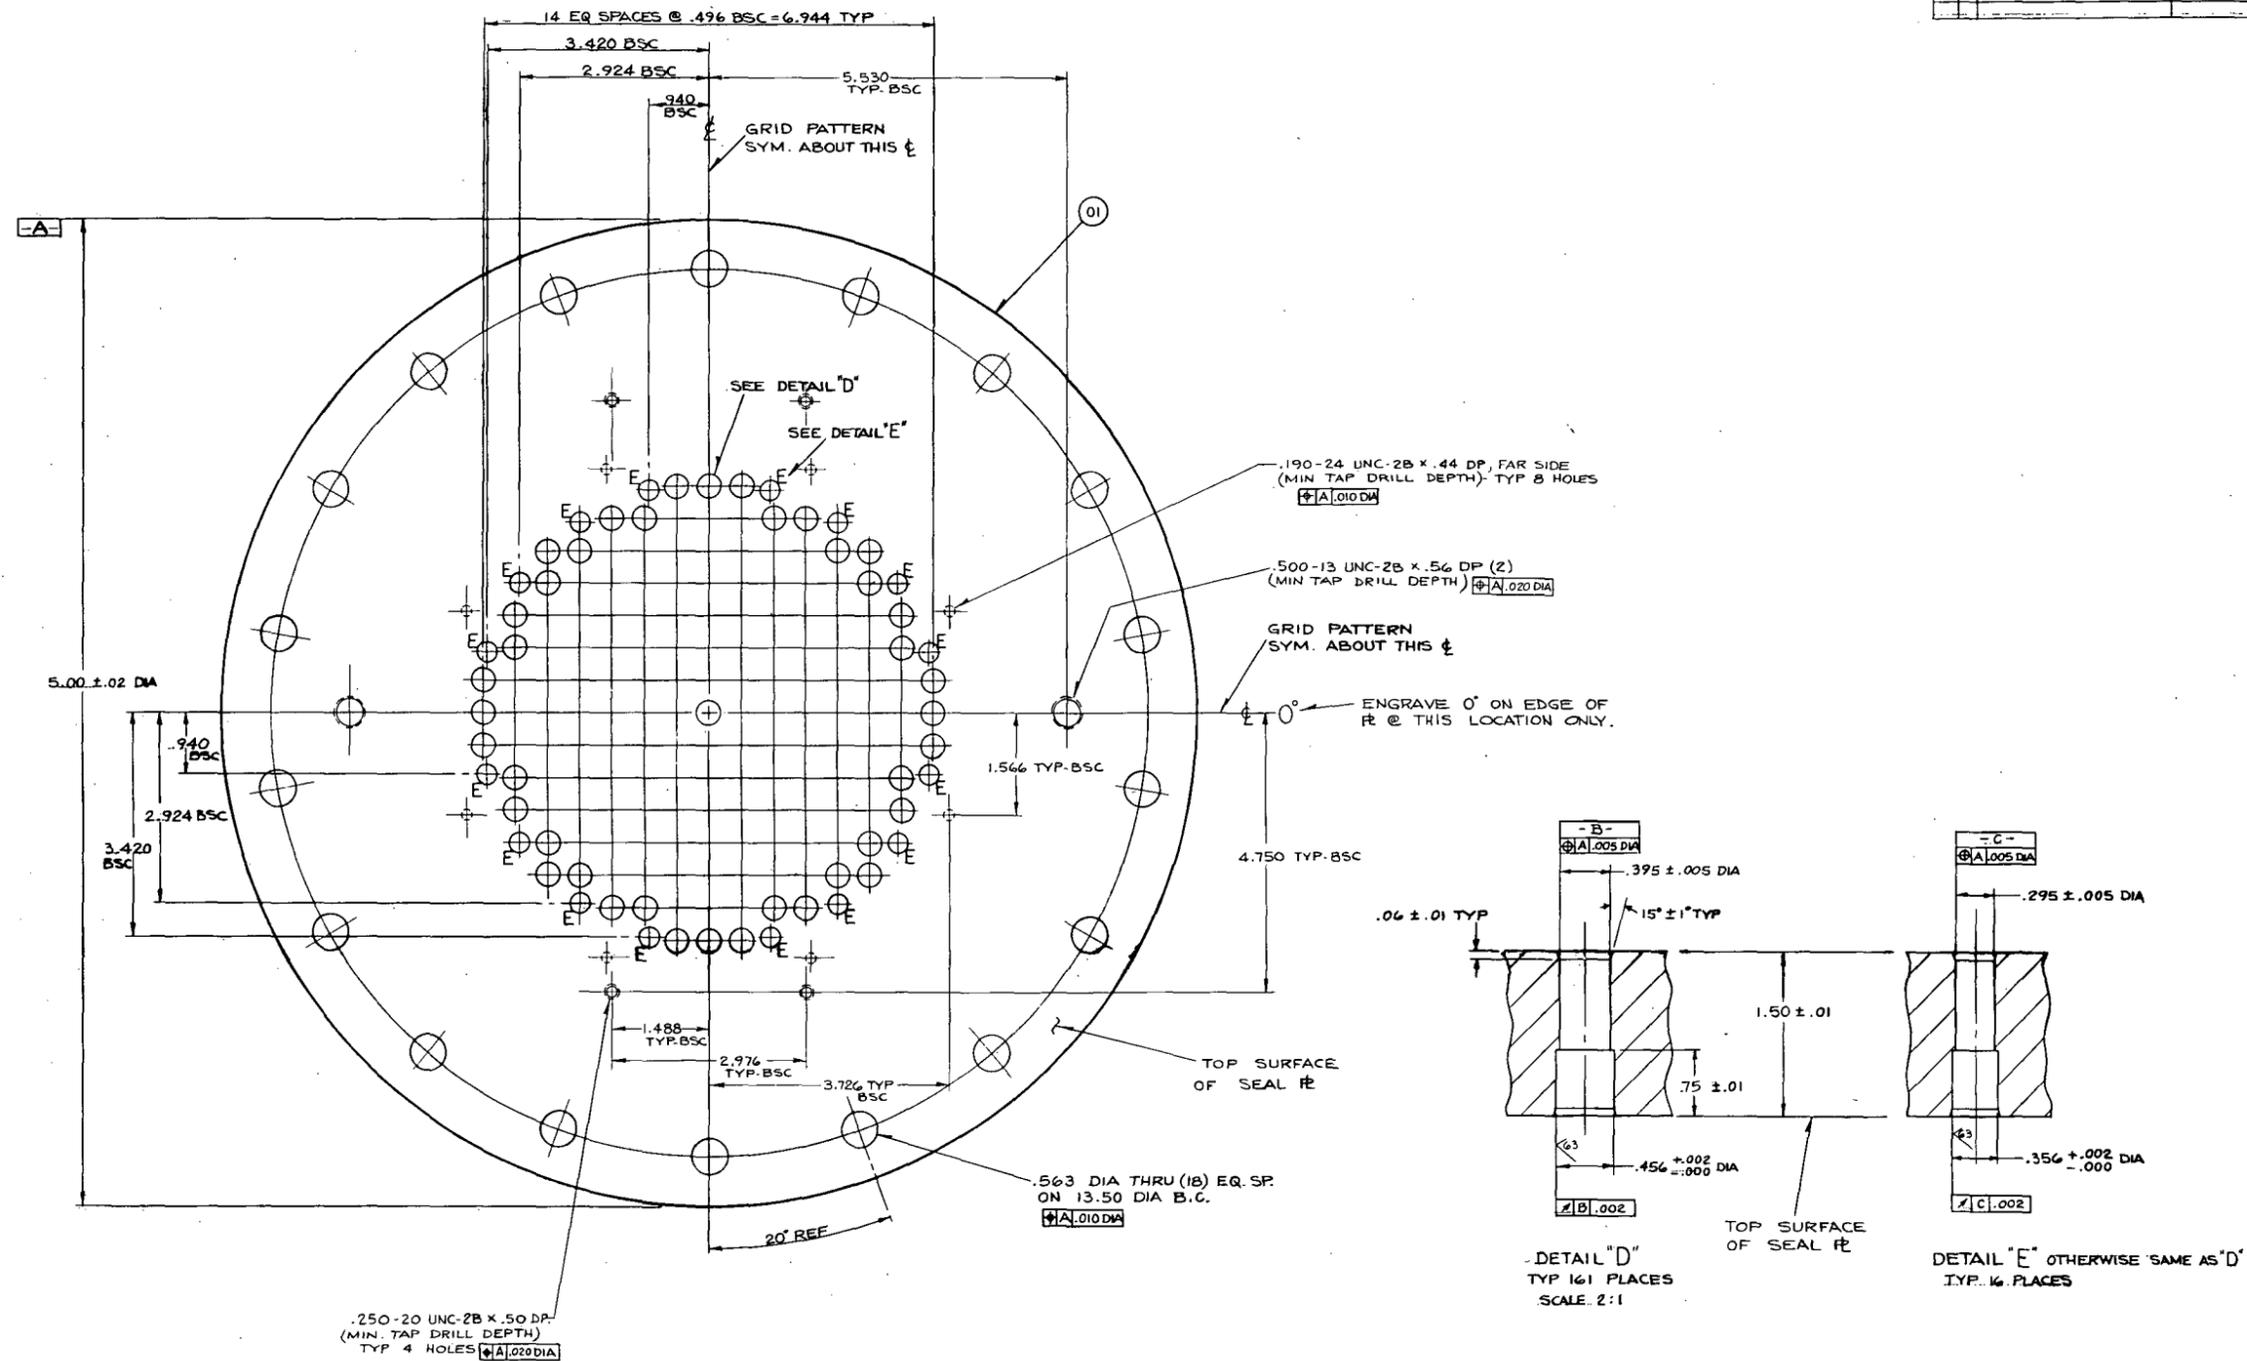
Strongback and Assembly Fixture (FLECHT-SEASET Unblocked Bundle) Sheet 1 of 2
